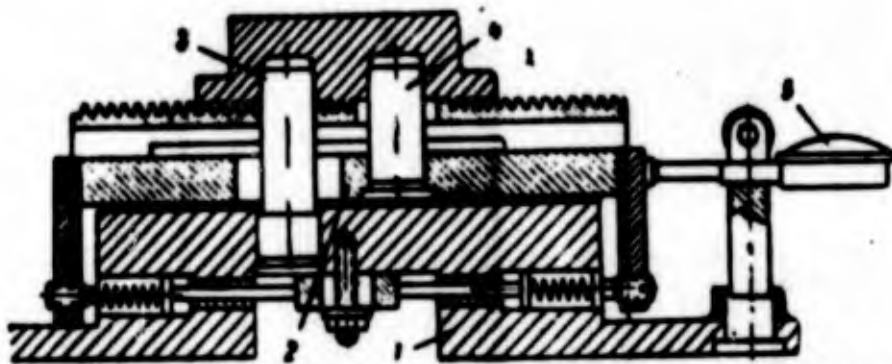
Instrument for measuring distances between axes of holes in housings. 1) housing; 2) carriage; 3) motionless spindle; 4) mobile spindle; 5) indicator.
